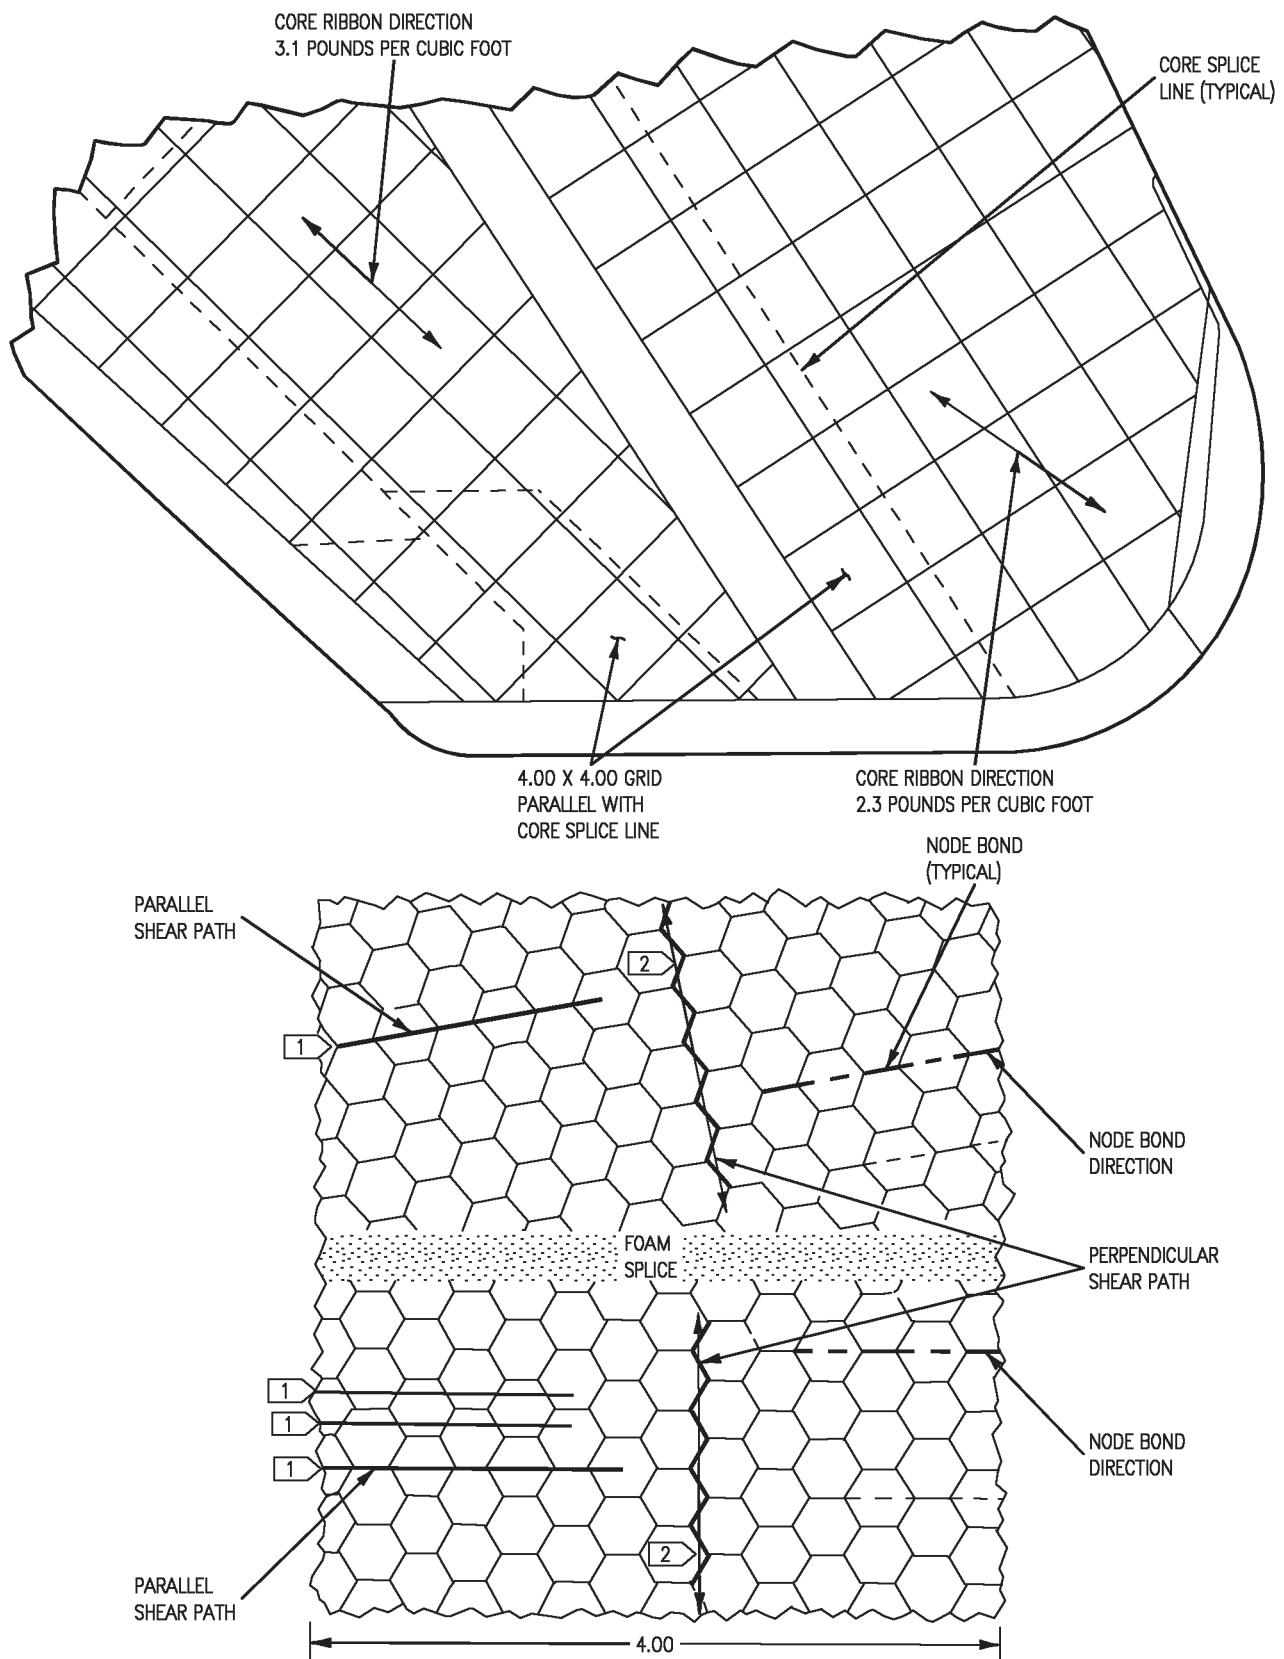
Definition and Examples of Shear Path Failure (Sheet 1)
